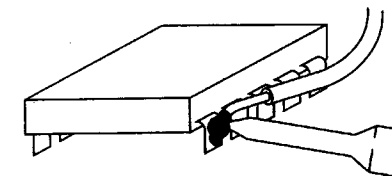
Feeding stripped wire wrap wire into reheated solder bump
